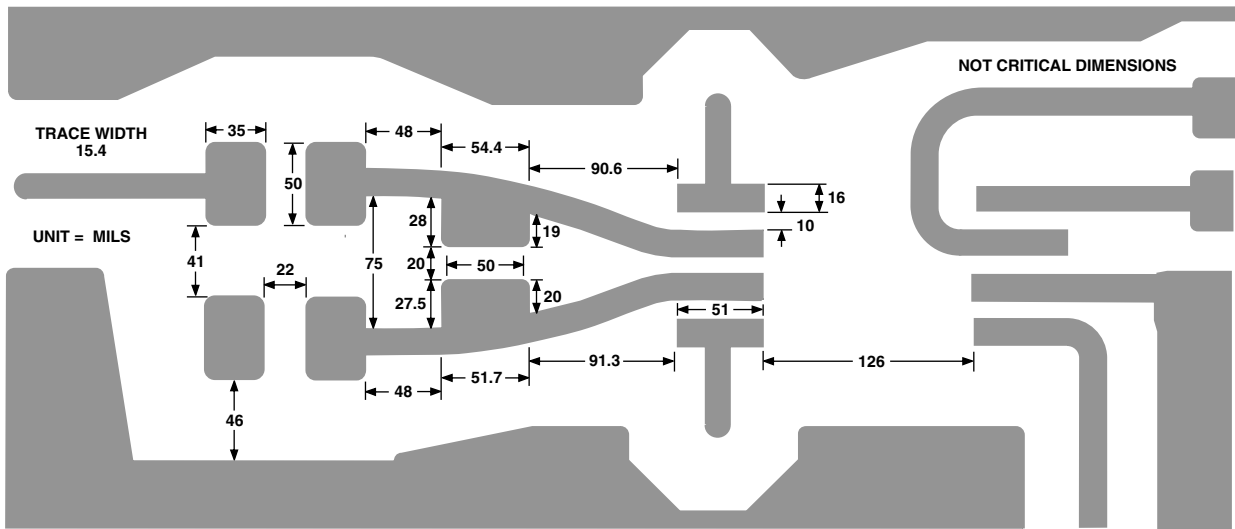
Detail of PCB Footprint for Package and Pads for Matching Network
